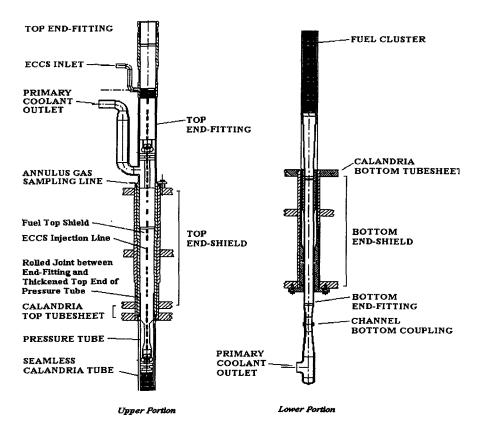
Coolant channel assembly of AHWR, also showing fuel, and portions of end-shields
